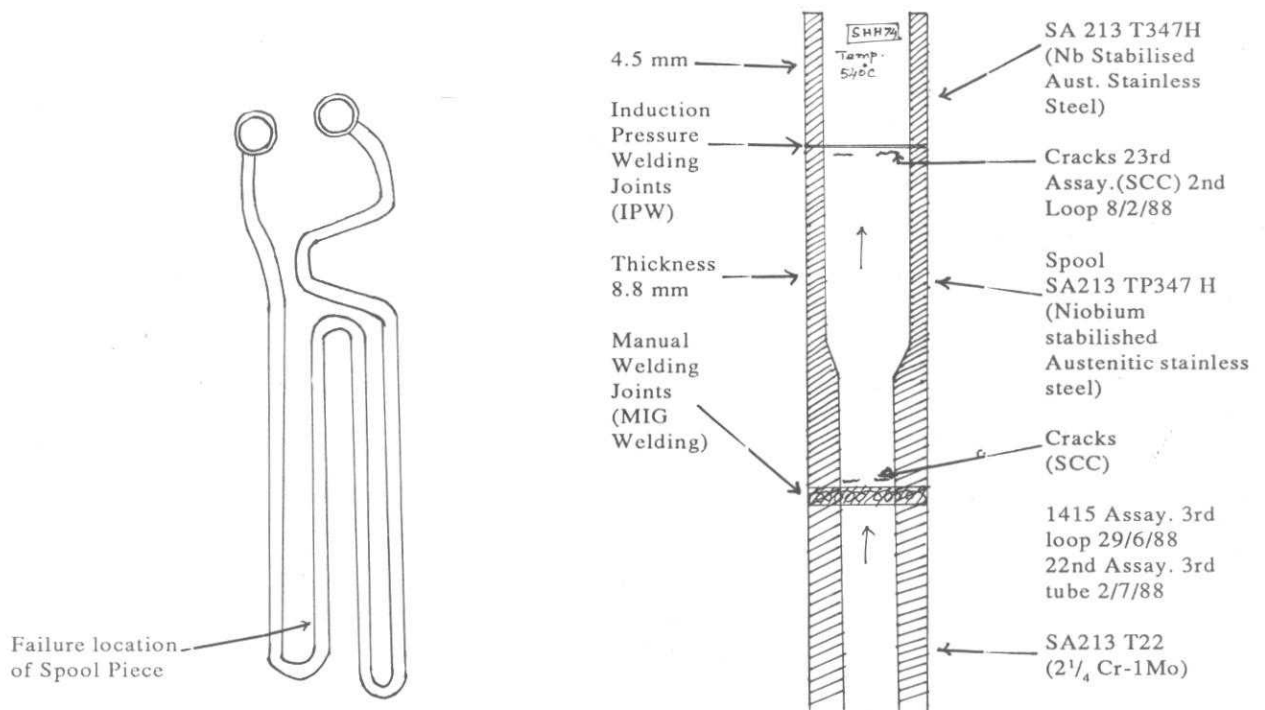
Final Super Heater Assy. (Coil) Showing Failure Location of Spool Piece
